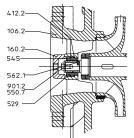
Dismantling the plain bearing - axial suction nozzle
